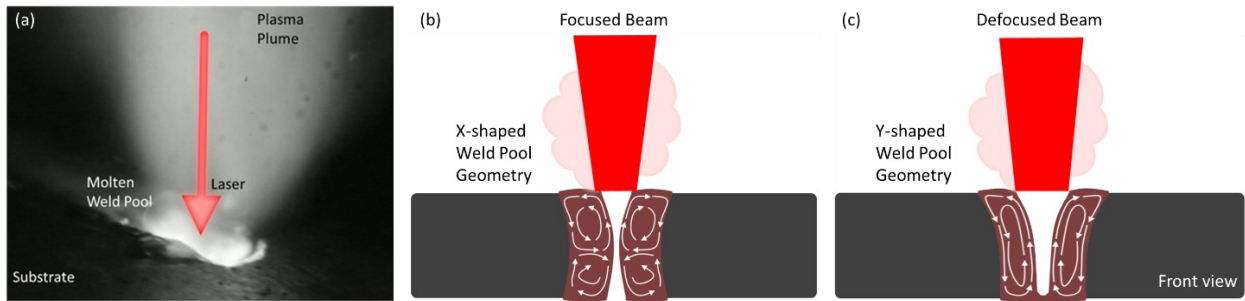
(a) Still image of the OKM laser welding process showing the keyhole surrounded by the molten weld pool. (b) and (c) show the schematic of the weld cross-section for the fully focused and defocused conditions, respectively.
